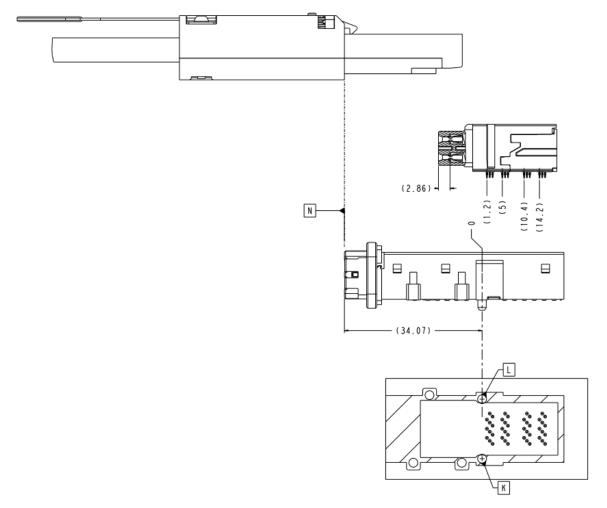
Cage, X4 Through-Hole Connector, Module Alignment
